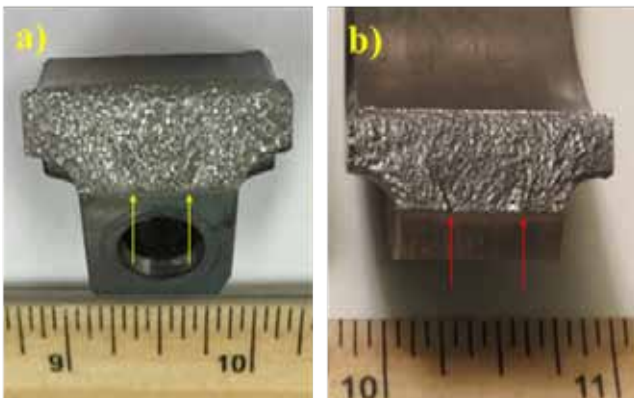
Macroscopic evaluation of the fracture surfaces: a) top fracture surface; b) bottom fracture surface
